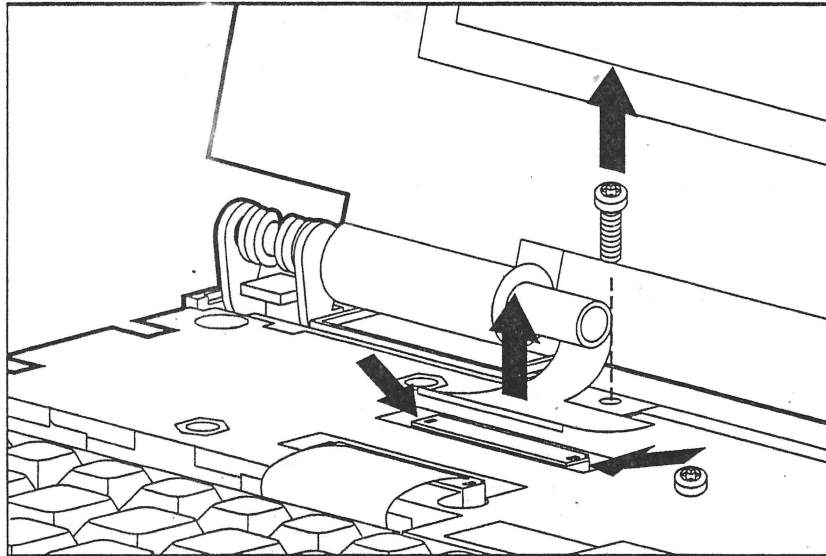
Removing the Cable Screw and Unlocking the LIF Connectors
